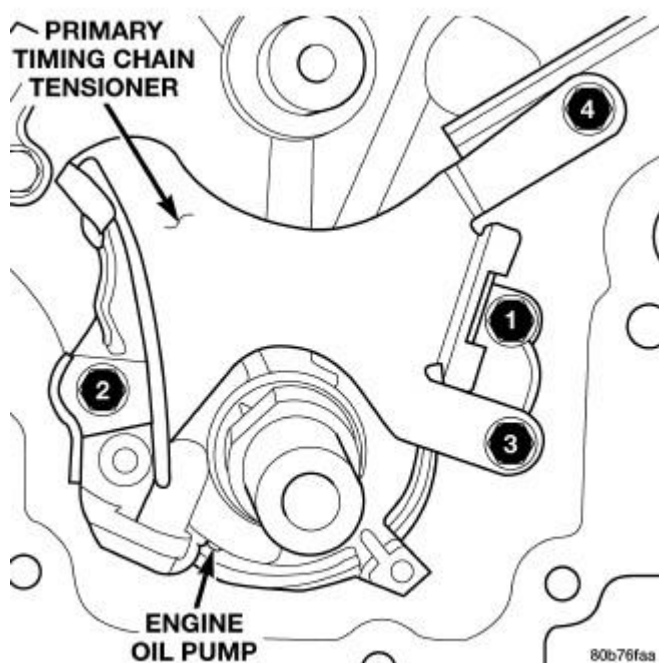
Oil Pump And Primary Timing Chain Tensioner Tightening Sequence
